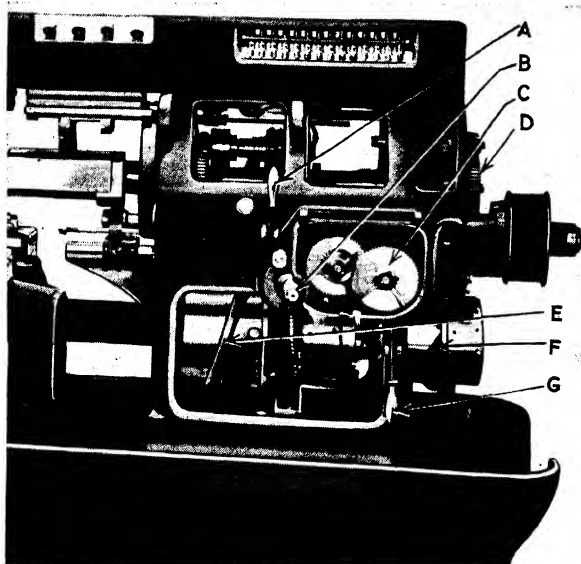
Construction of gear-box section. *A*, Start and stop lever. *B*, Shaft for hard crank. *C*, Feed change gears. *D*, Speed change gears. *E*, Main slide cams. *F*, Threading cams. *G*, High-speed lever.
